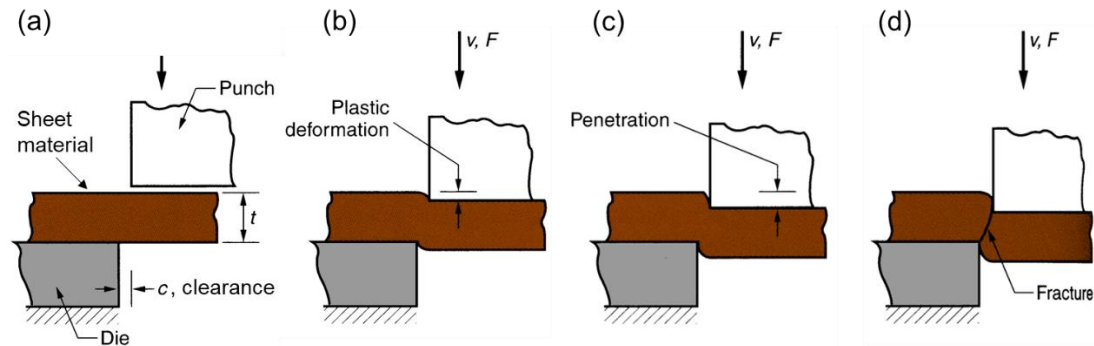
(a) General positioning of tools in a shearing process, (b) initial cutting occurring by plastic deformation, (c) shearing during punch penetration, and (d) fracture following shearing, adopted after [22].
